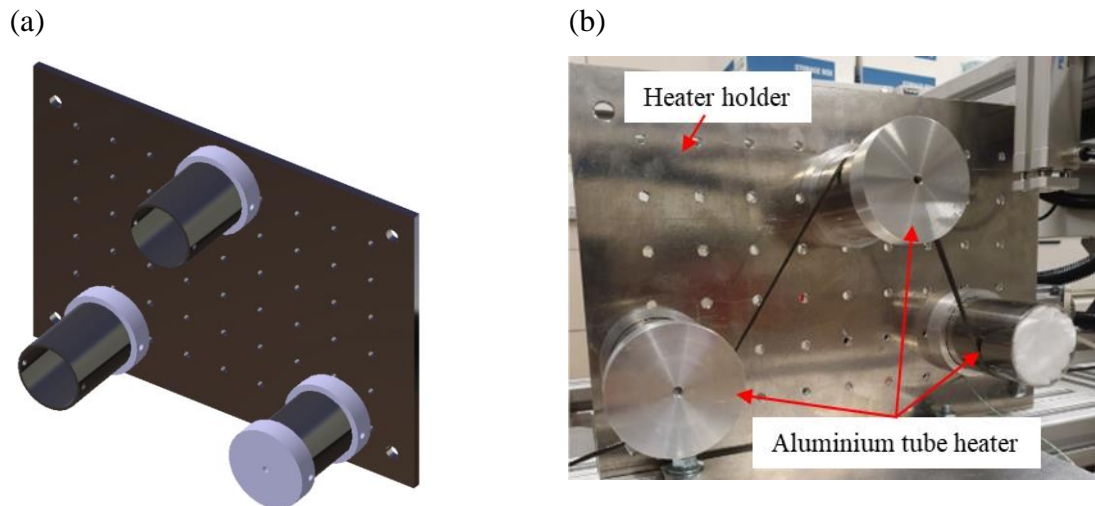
3D design of fibre drawing device (a), and assembled drawing device (b)
